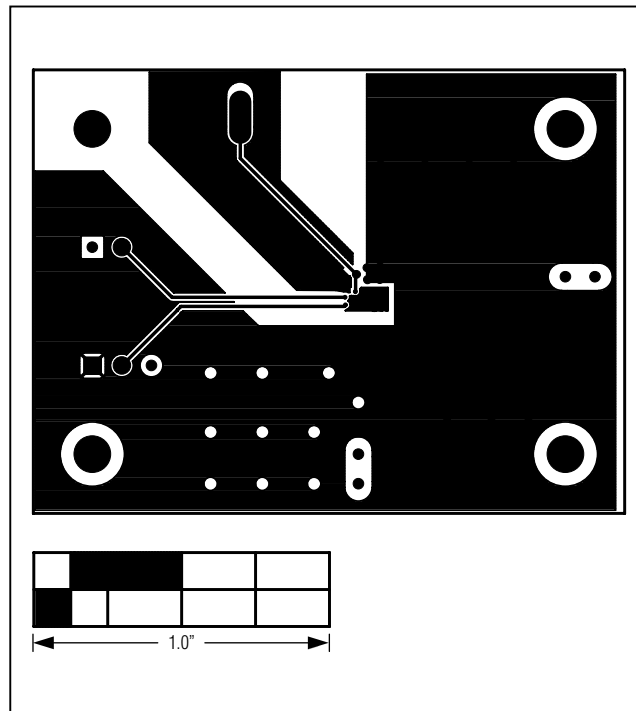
MAX8989 EV Kit PCB Layout—Inner Layer 2
